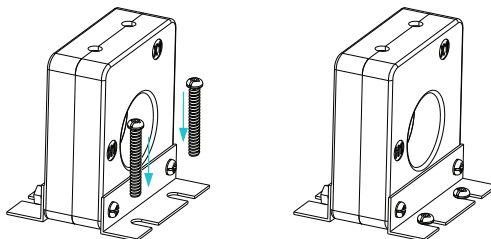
Mounting Screw in CT Mounted to Panel or Backplate
